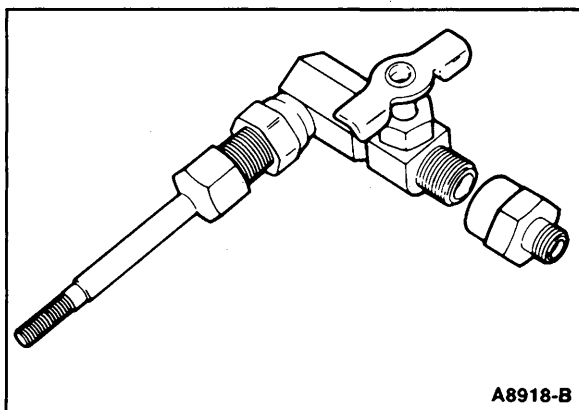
T83T-9000-A Fuel Transfer Pump Pressure Adapter
